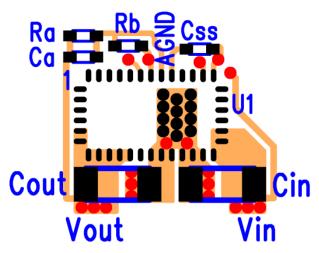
Top PCB Layer Critical Components and Copper for Minimum Footprint
